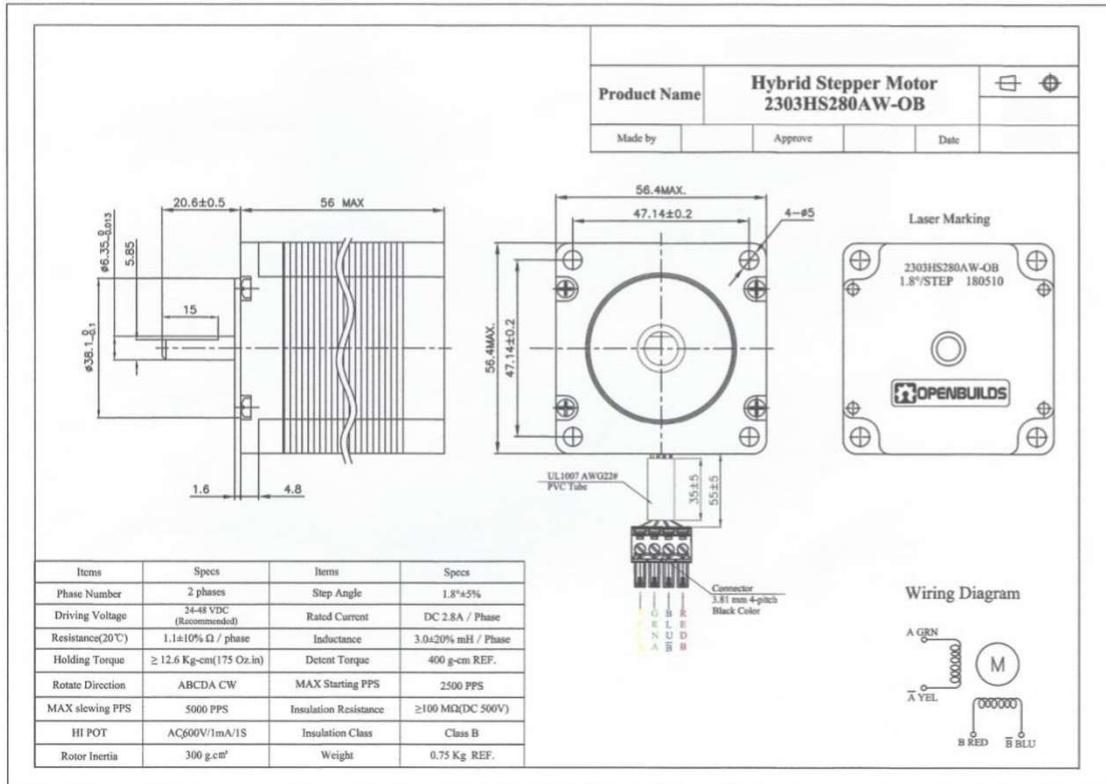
Manufacturing Drawing of part SS#2-P#2 – NEMA 23 Stepper Motor
